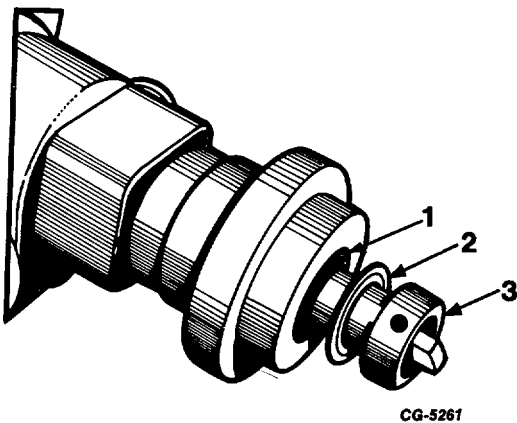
Lower Thrust Washer (Distributor for V-537 Engine)
